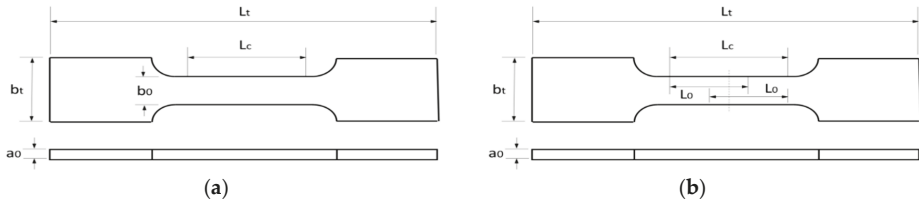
(a) Tensile specimen dimension; (b) Gage section and measurement distances.
